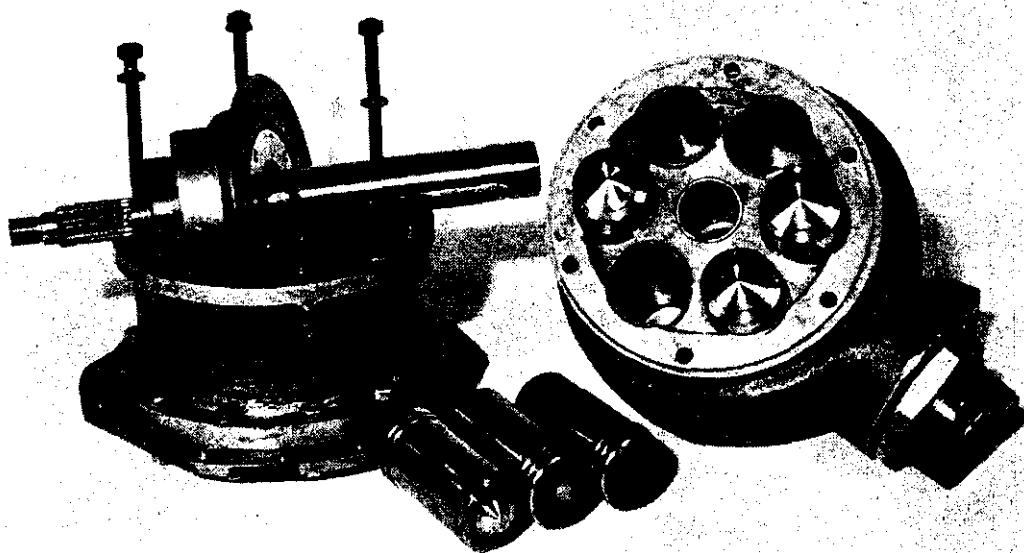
(b)—THE SWASHPLATE TYPE COMPRESSED AIR MOTOR STARTER
